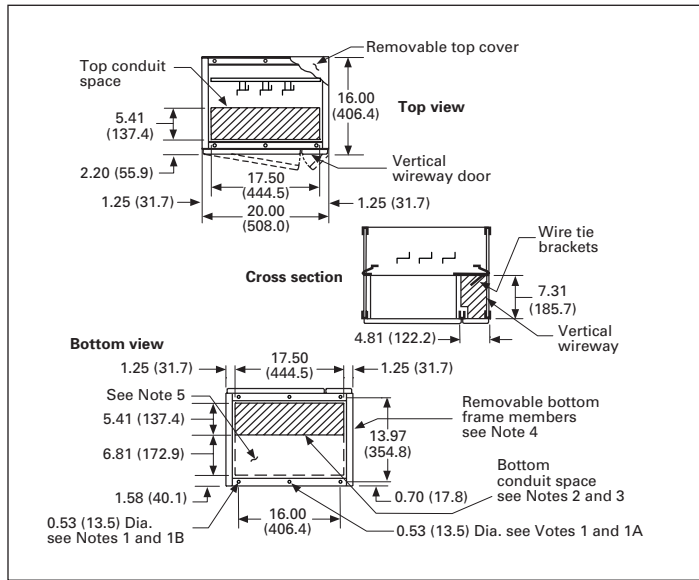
20 inches wide, 16 inches deep, front mounted only (4710A30)
